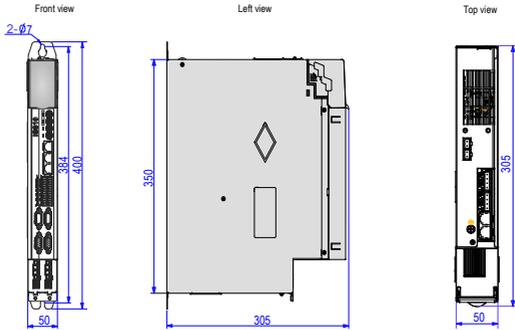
IS810N50M4TINT (SIZE 2) overall dimensions
